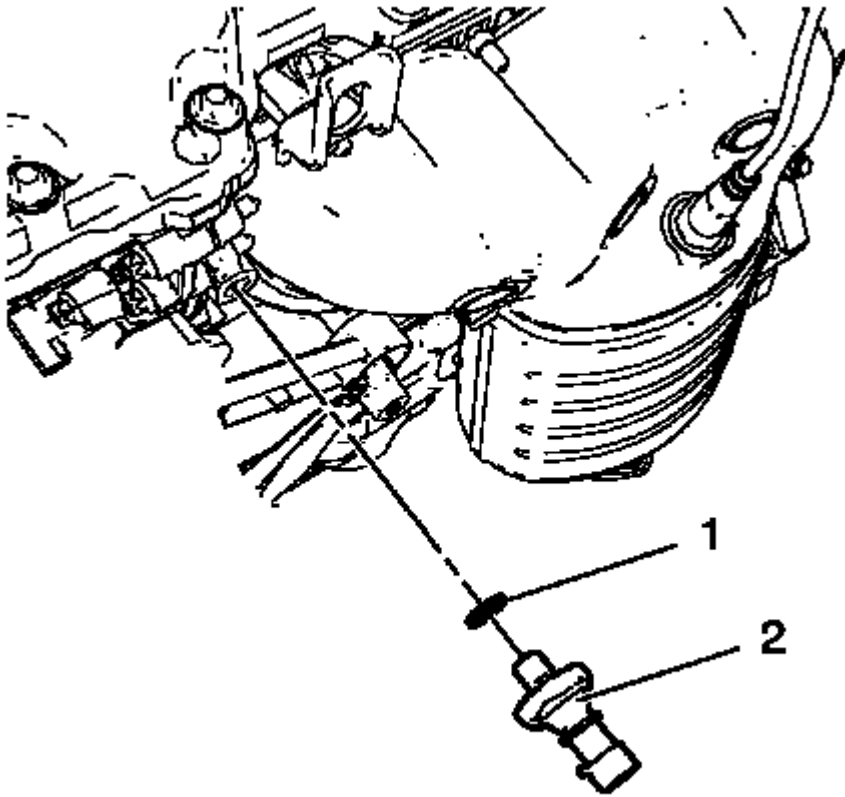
Oil Pressure Indicator Switch And Oil Pressure Indicator Switch Seal Ring
